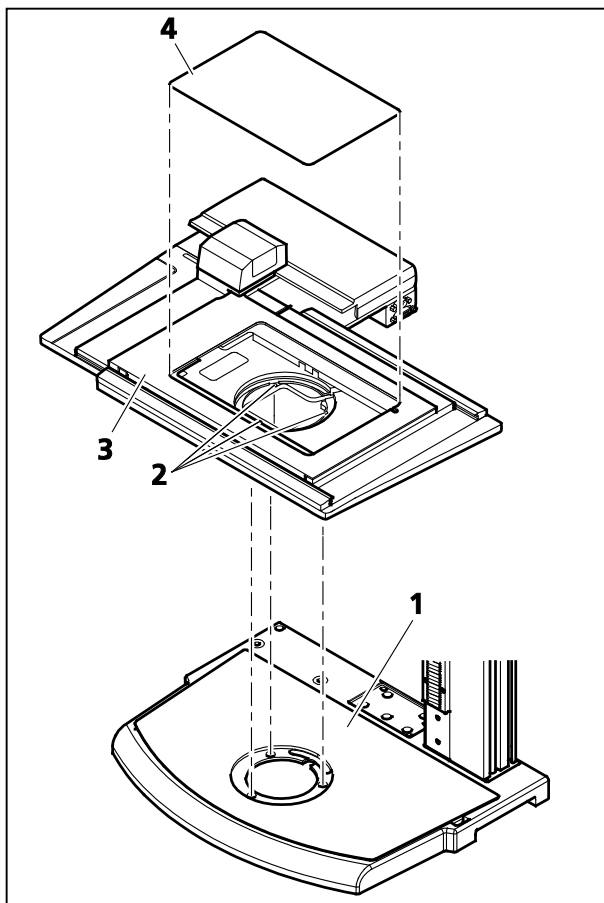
Mounting the mechanical / measuring stage mot. on stand base 450
